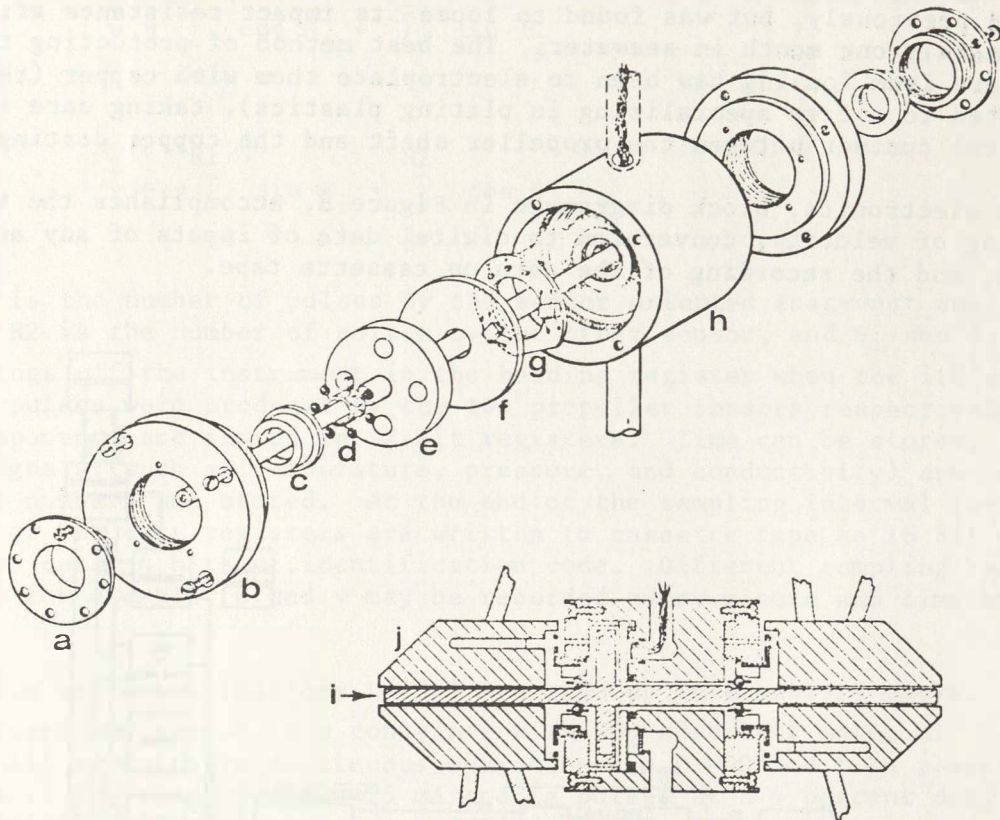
Sensor design. The various parts are: a) adjustable bearing retainer, b) end cap, c) outer race of bearing, d) balls and ball separator, e) disc with four magnets, f) aluminum disc that seals out the seawater, g) magnetodiodes on annular printed circuit board, h) sensor hub, i) propeller axle, and j) partial view of propeller.
